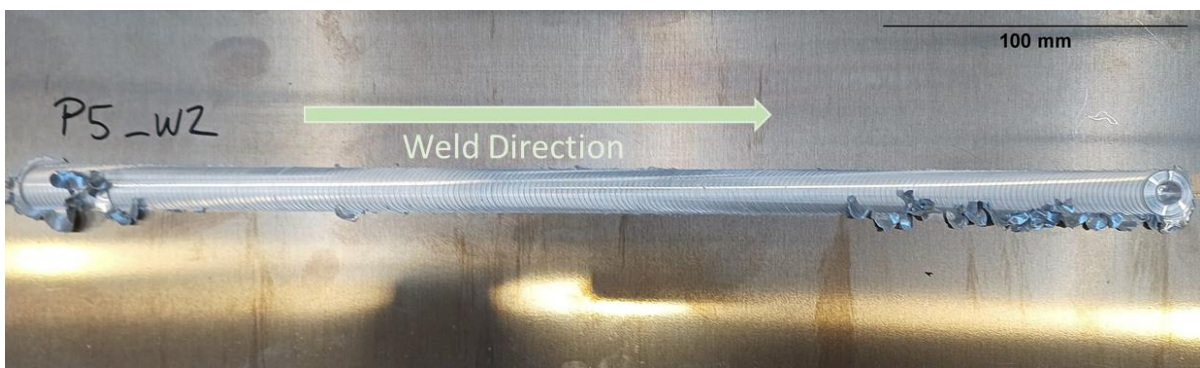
Topside of the weld V2 with flash generated during the weld
